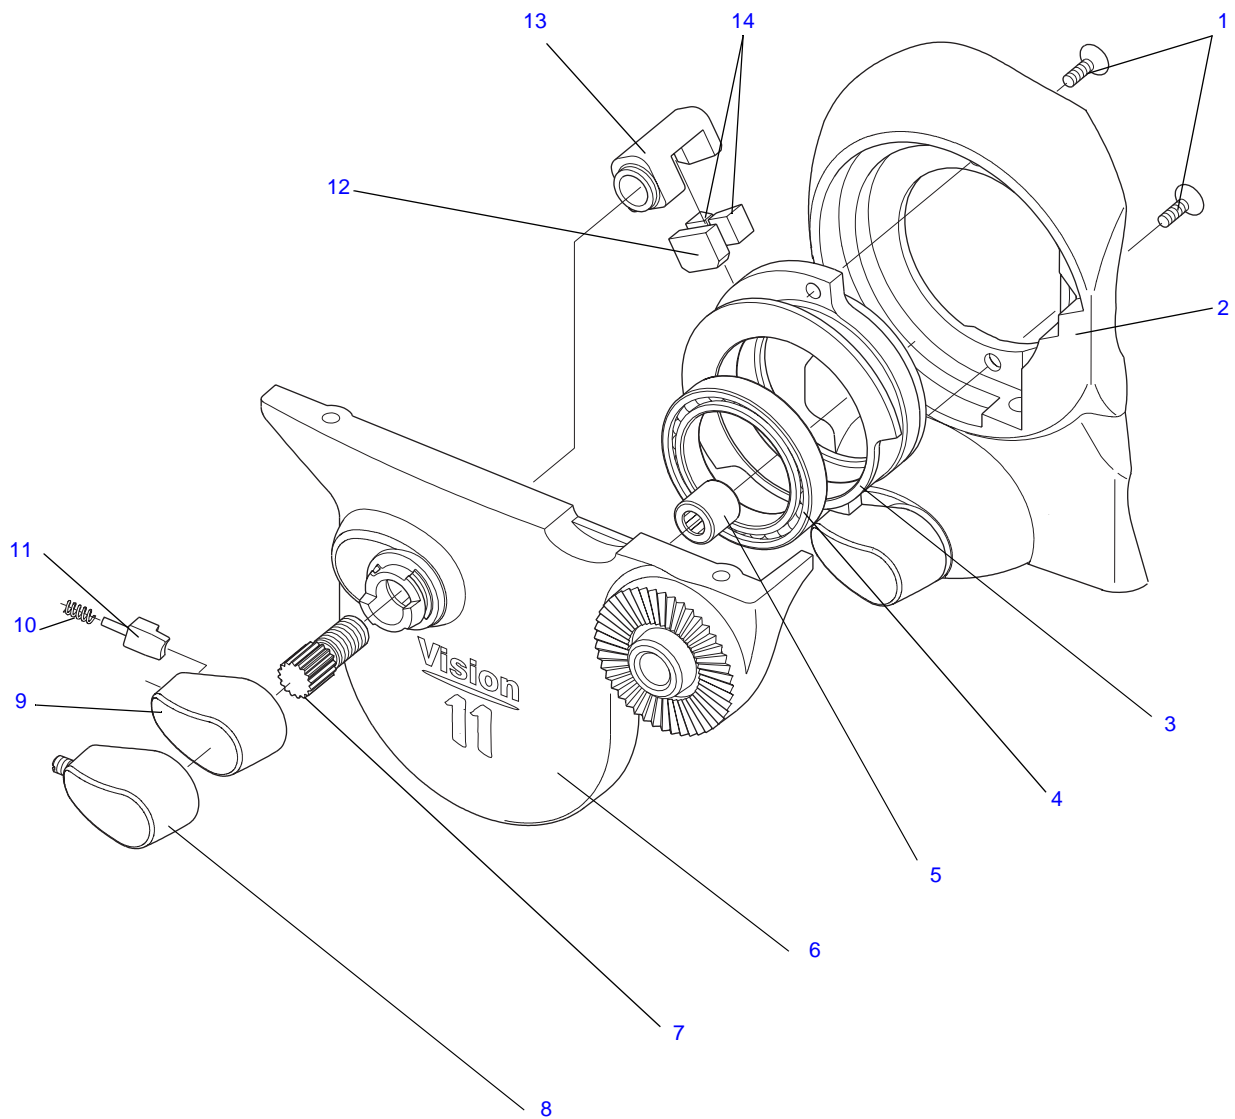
Vision 11 Pan and Tilt Head -Tilt Drag Unit Assembly
